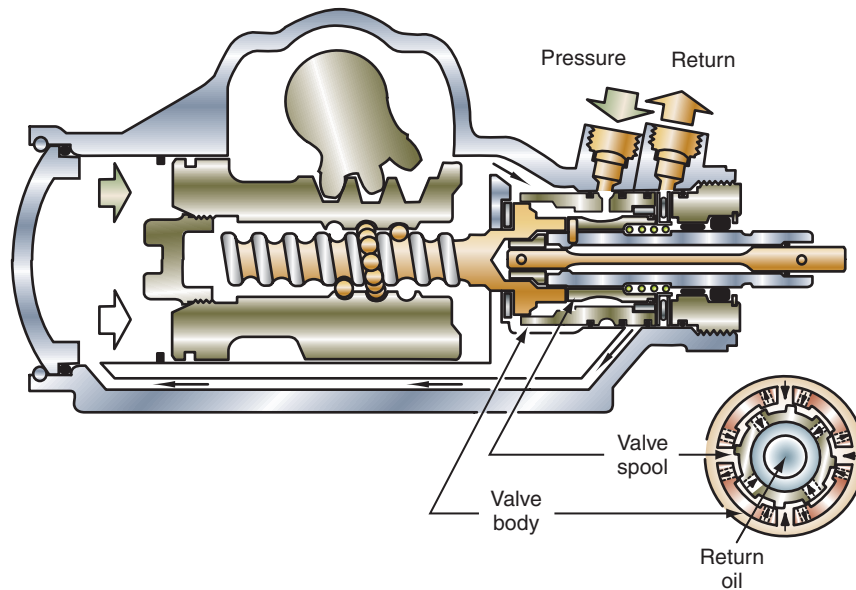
Power steering gear fluid flow during a left turn.
